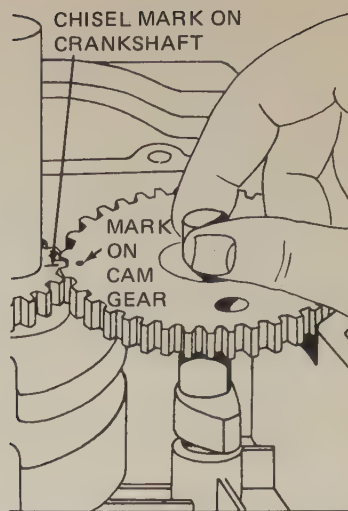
Lifting camshaft out of the engine. (Briggs & Stratton Corporation)
